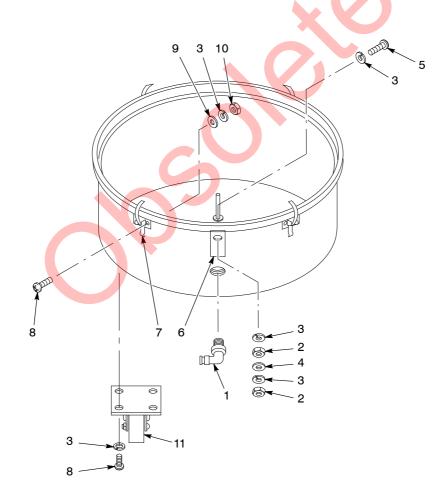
NHR-18-150 Hopper Fluidizing Drum Parts
